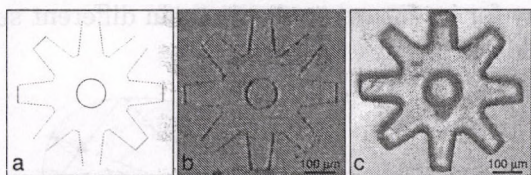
Gear-wheel. a) design, b) DIC microscopy photo before etching, c) after etching
